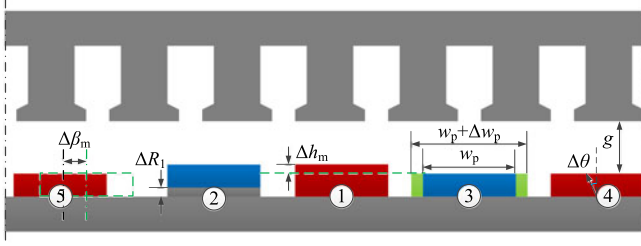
Manufacturing tolerances on the rotor.
